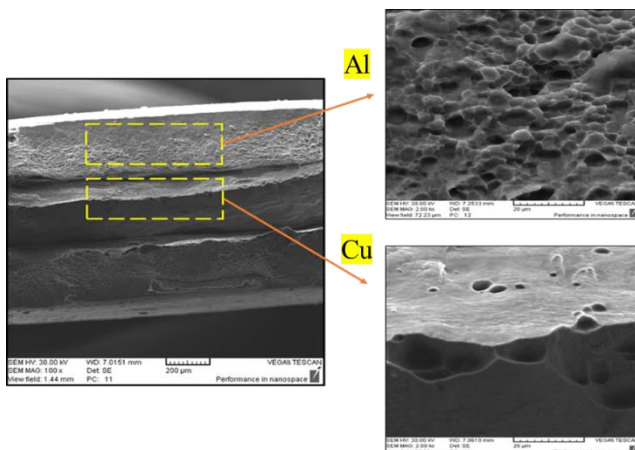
Tensile fracture surfaces of Al/Cu/Al composite produced by CRB process
